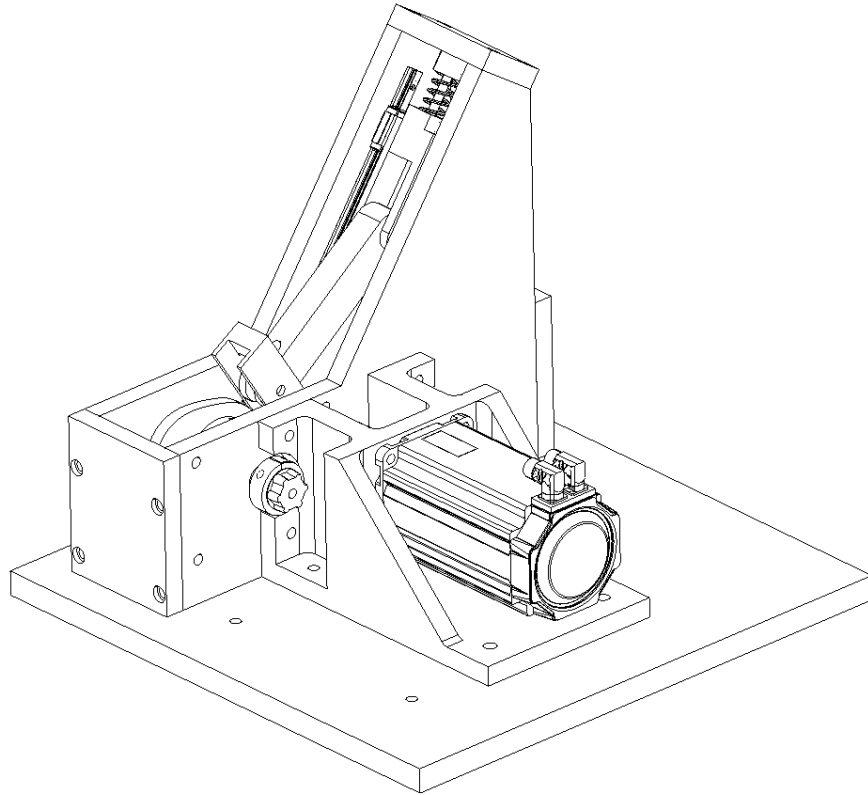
Direct-Drive Cam-Servo Test Machine, Servo Mode
